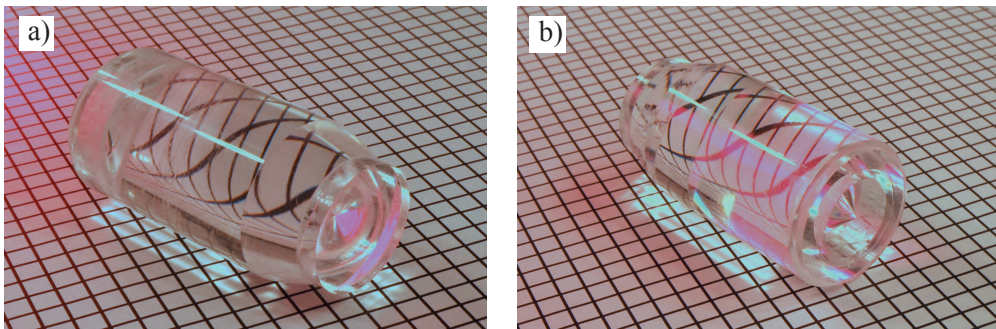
The completed prototype a) view of the focusing ring b) axicon side
